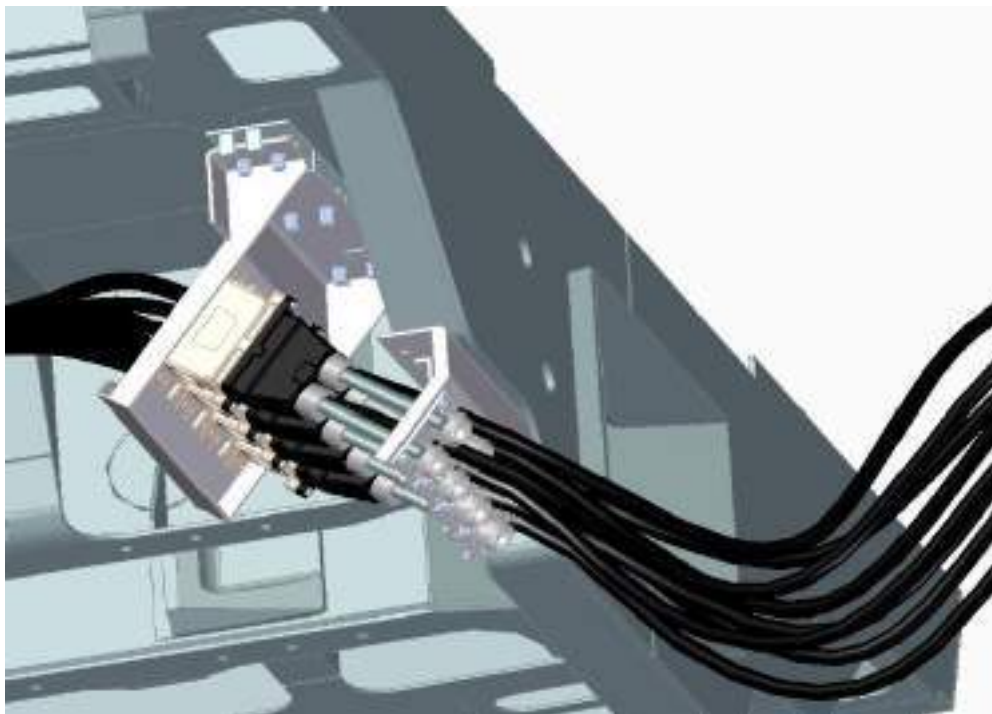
Mounting location of power coupler assembly on under-frame in Trailer coach
